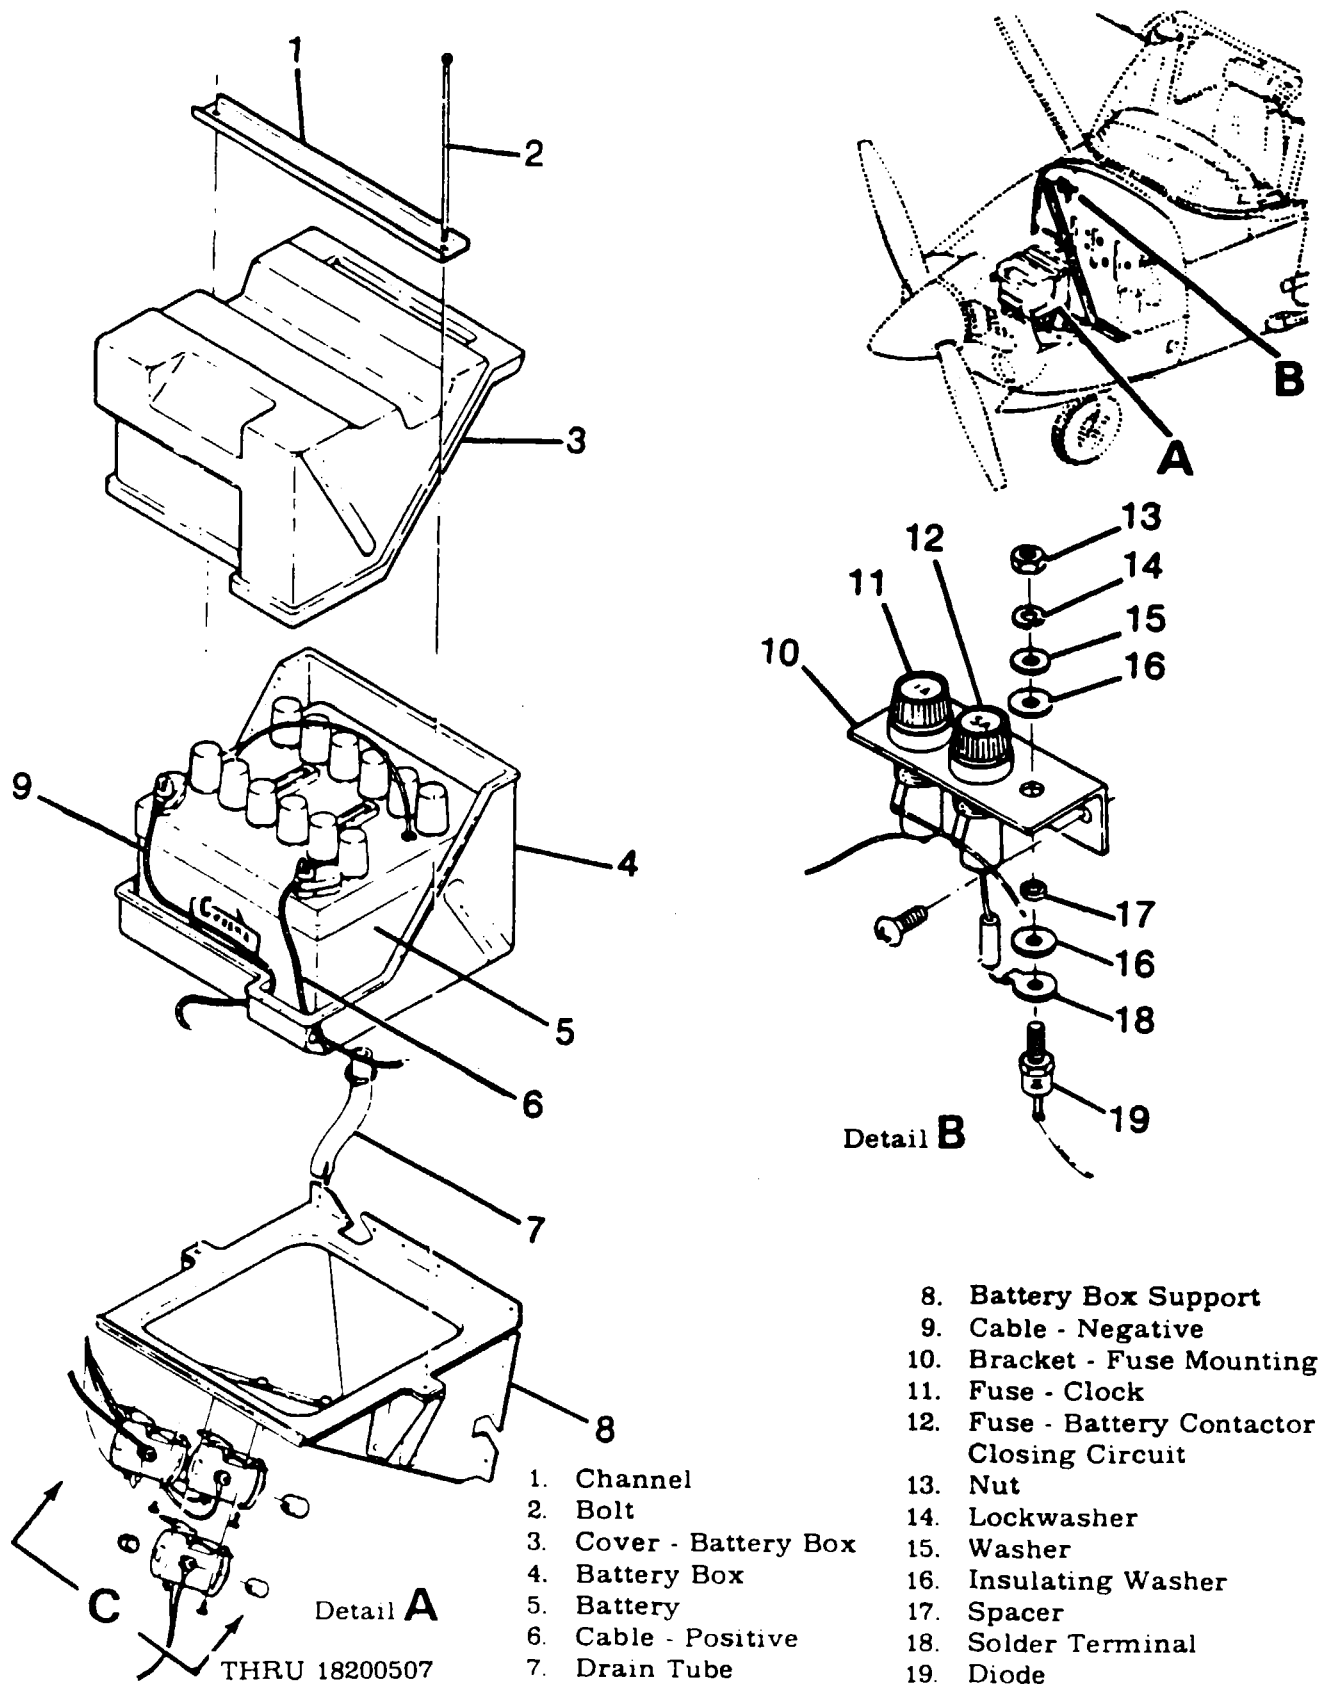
Battery and Electrical Equipment Installation (Sheet 1 of 7)
